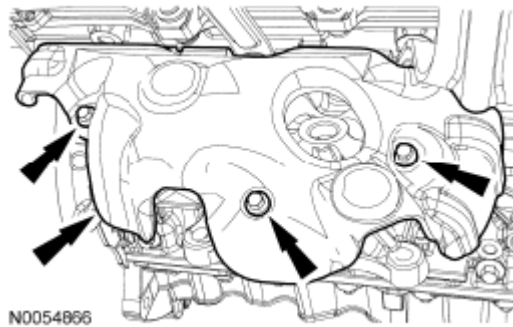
Locating RH Exhaust Manifold Heat Shield Bolts
